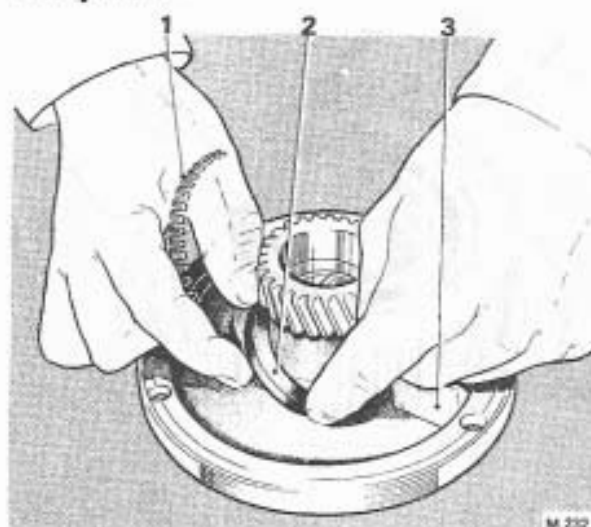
FITTING EXPANDER AND SEAL TO CLUTCH PISTON
